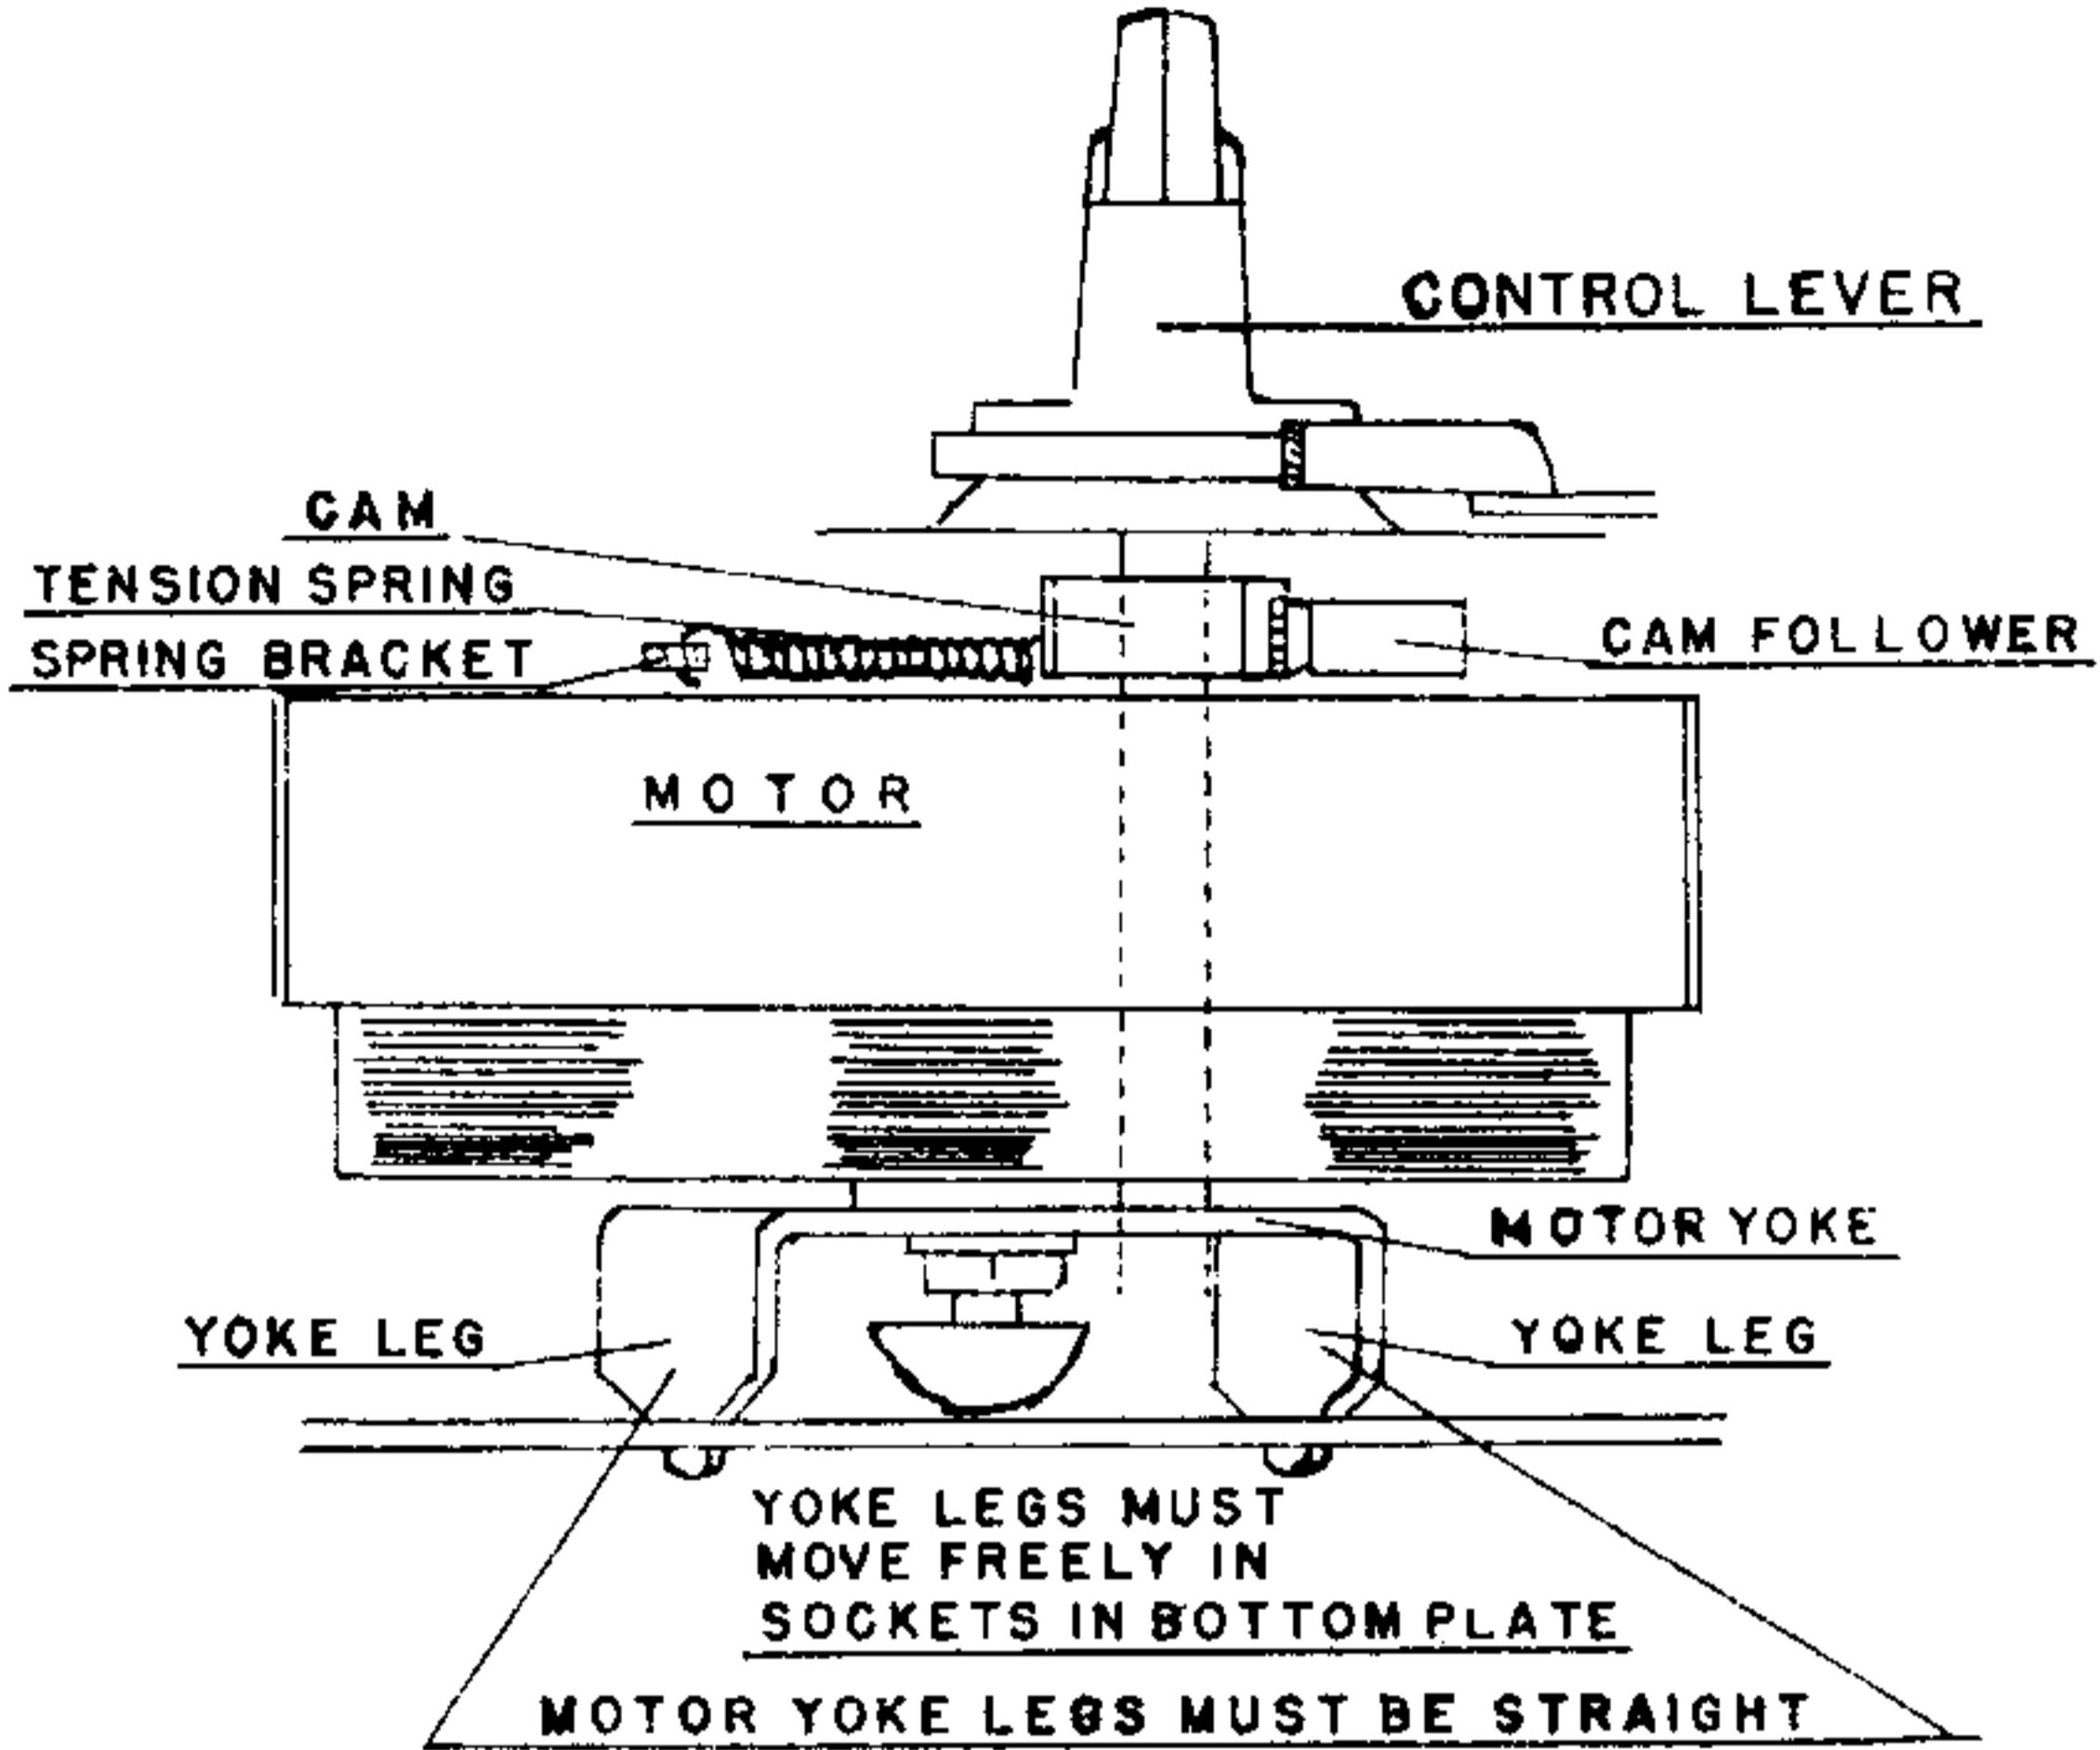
MOTOR POSITION ADJUSTMENTS
